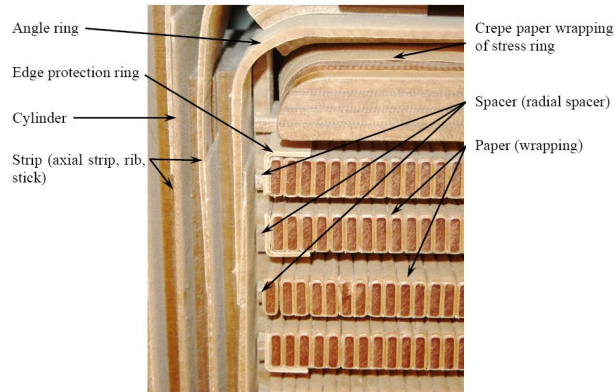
Cross-sectional view of a 400 kV transformer end insulation (detail).
